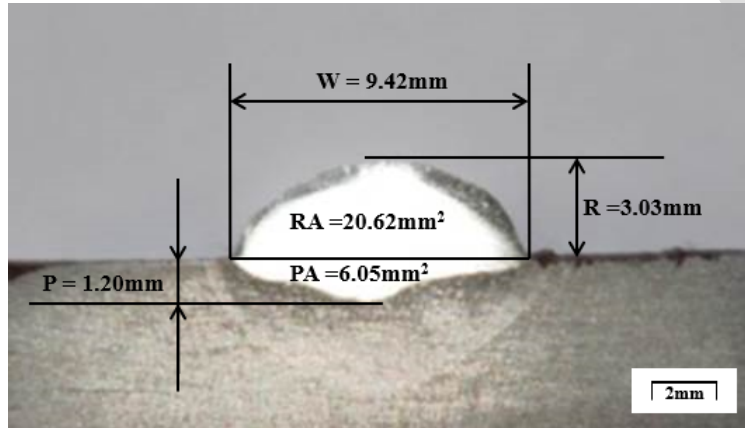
Original photo of the 19-th experimental weld bead
